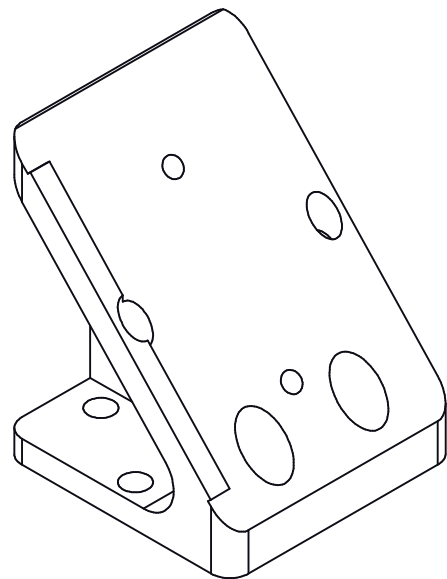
View of 47° dovetail mounting adapter from above (tripod side)
